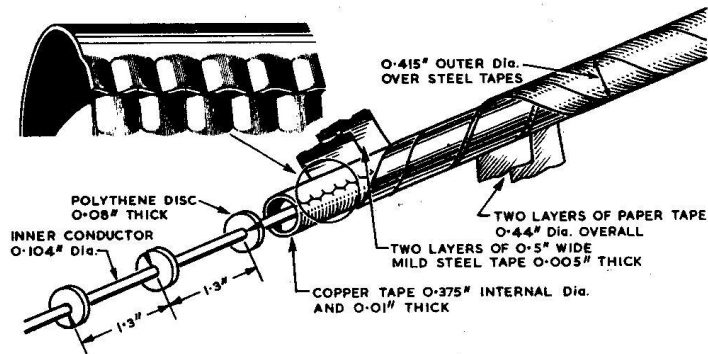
BRITISH DIMENSIONED COAXIAL TUBE.
